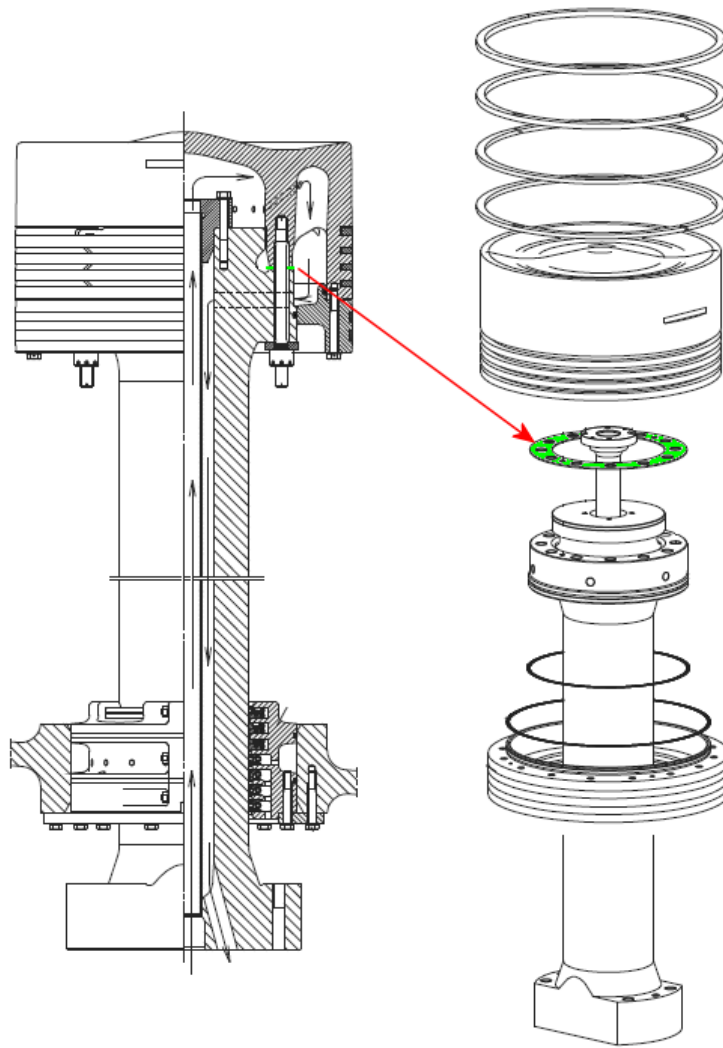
Schematic of the piston rod assembly, highlighting the location of the laser textured, high friction shim
